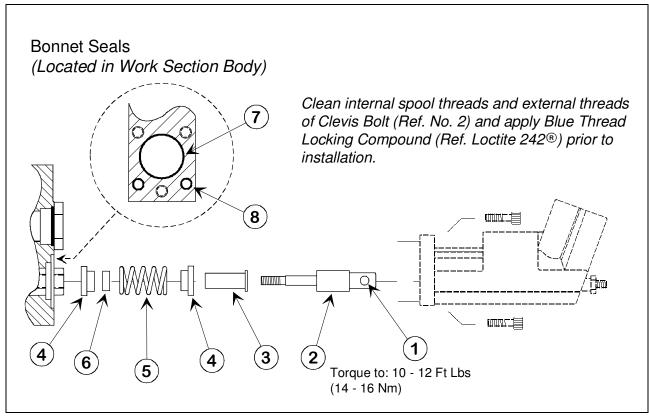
[SOL-IH] and [EPC-IH] Solenoid Bonnet Assembly
